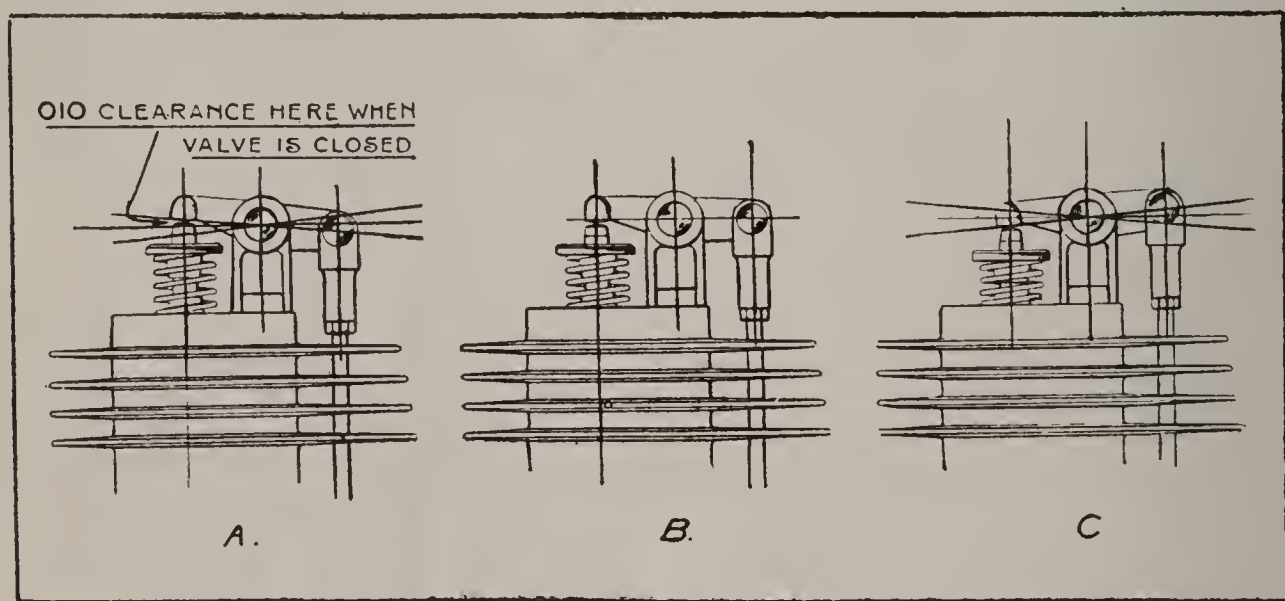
Positions of Rocker Lever Used in Depressing Overhead Valves. A—Showing Clearance When Valve is Closed. B—Valve Half Opened. C—Rocker Arm Position With Valve Fully Opened.
